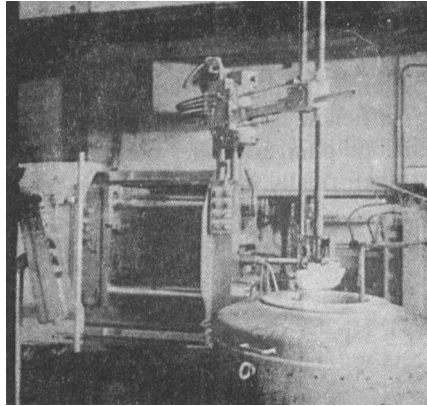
Automatic ladle fitted to a cold-chamber die-casting machine
